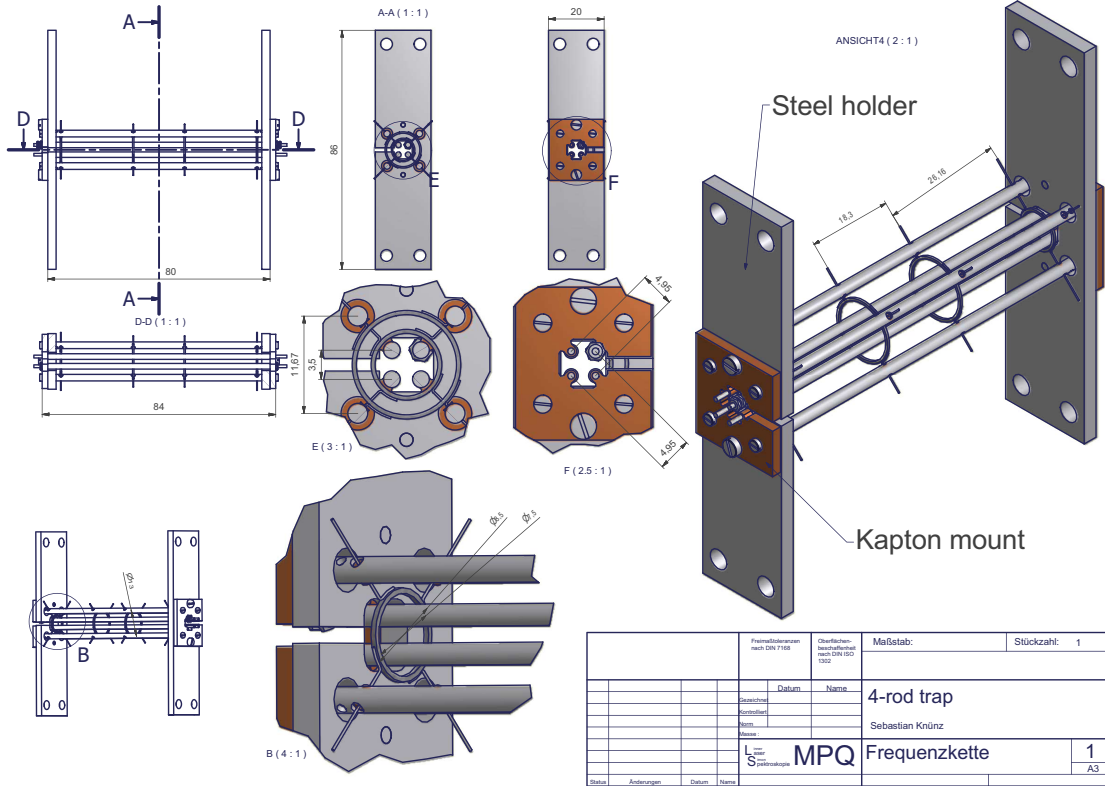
Technical drawing of the four-rod trap. It is mounted to Kapton plates which provide electrical isolation. The mounts itself are screwed onto larger stainless steel frame plates. Axial confinement can be generated with four ring electrodes which are held by four additional rod electrodes. These four rods also increase the stability of the structure and are used to apply micromotion compensation voltages.
